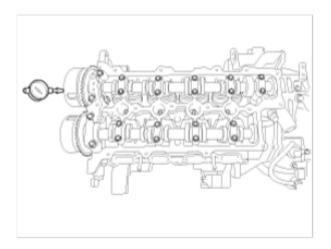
Measuring Bearing Oil Clearance Courtesy of HYUNDAI MOTOR AMERICA
